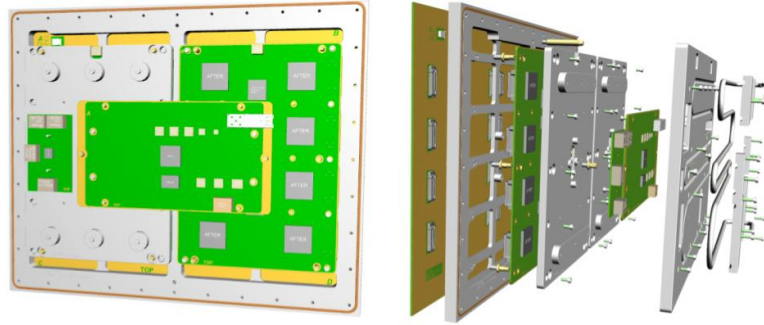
CAD of the electronics mounted on the detector (left) and in exploded view (right) to also visualise the shielding and cooling system.
